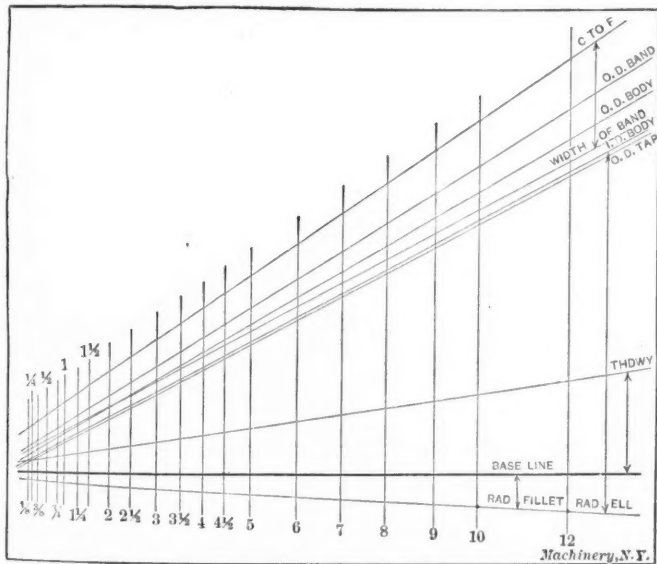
Second Diagram, used for Pipe Fitting Dimensions
